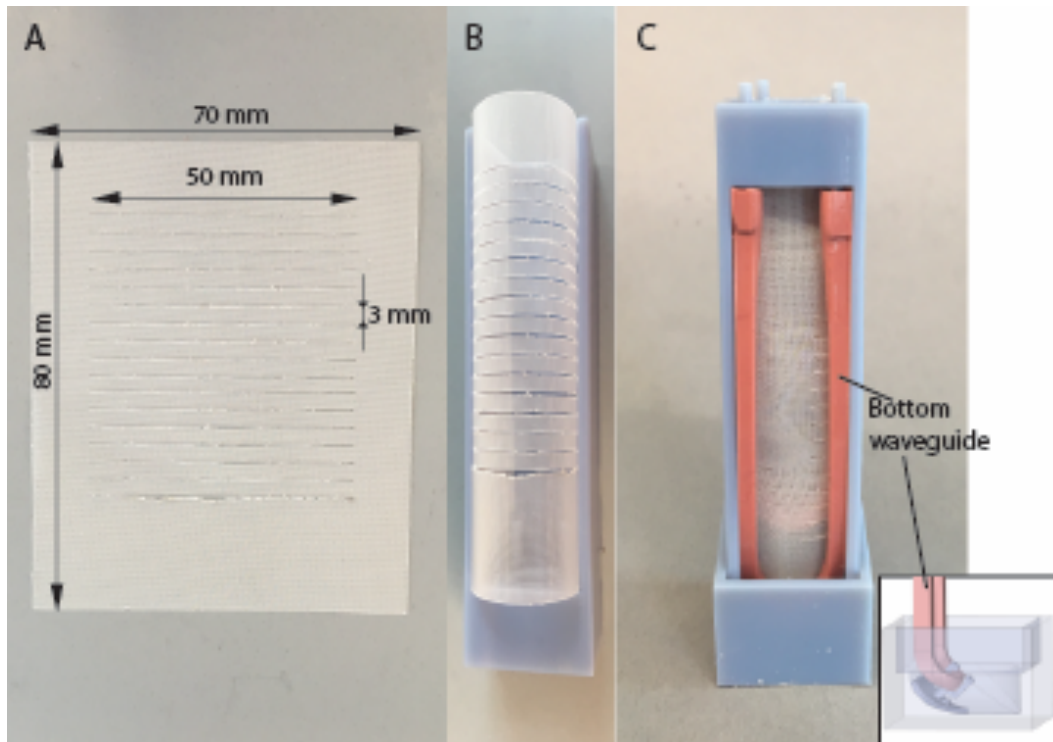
Nylon fabric and mold assembly. (A) Cut nylon fabric; (B) Rolled nylon fabric; (C) Waveguides and nylon fabric assembled into finger mold.
